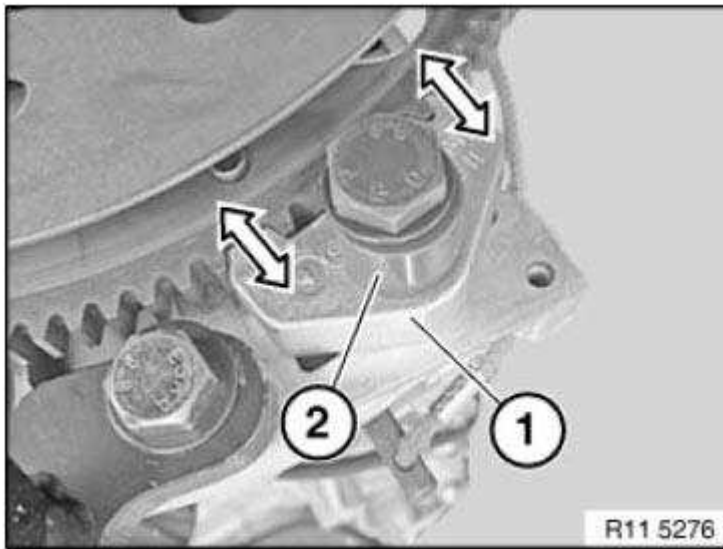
Securing Flywheel Using Special Tool 11 9 260/11 9 266
